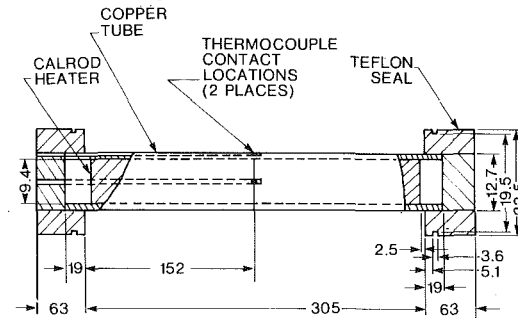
Details of copper tube and heater assembly. All dimensions are in mm
